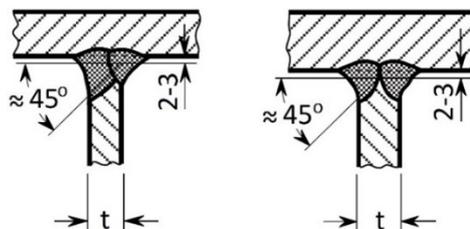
Single and double-bevel welds with full root penetration
